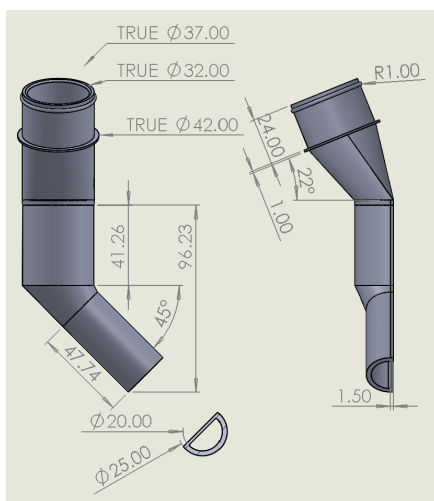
The SolidWorks design drawings for the 20 mm nozzle at angles $45^\circ/135^\circ$ with dimensions in mm.
